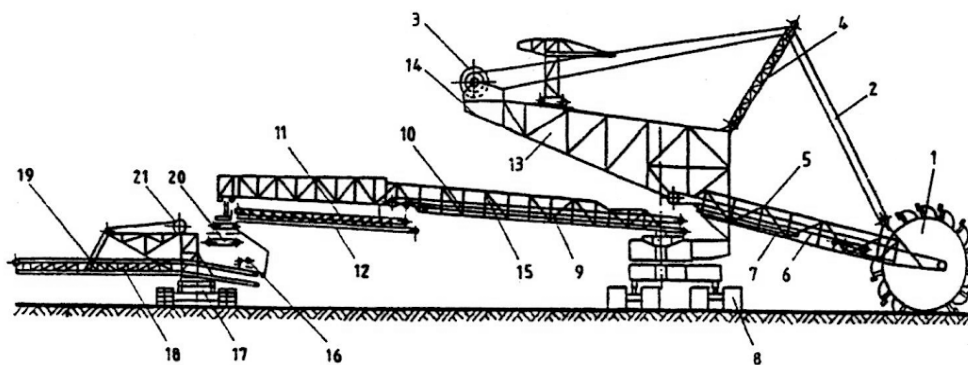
ESR_c – 1400 30/7 excavator with separate loading equipment
